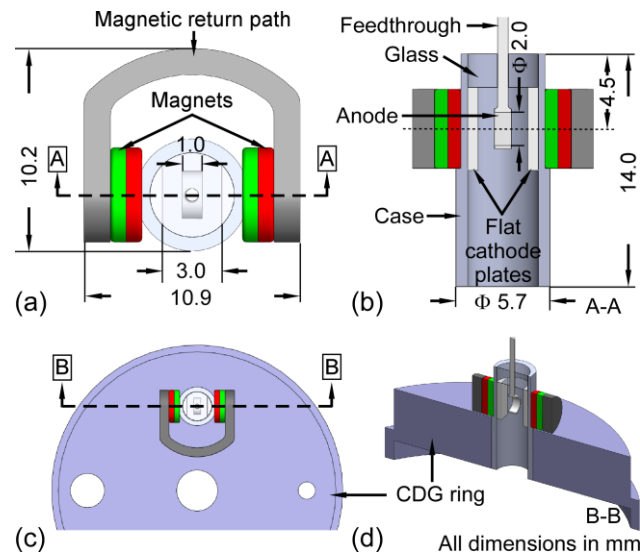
Schematic of Design P.MF.3 geometry (a) 3D, (b) A-A section. Relative position between Design P.MF.3 and CDG ring after assembly (c) top, (d) B-B section.
